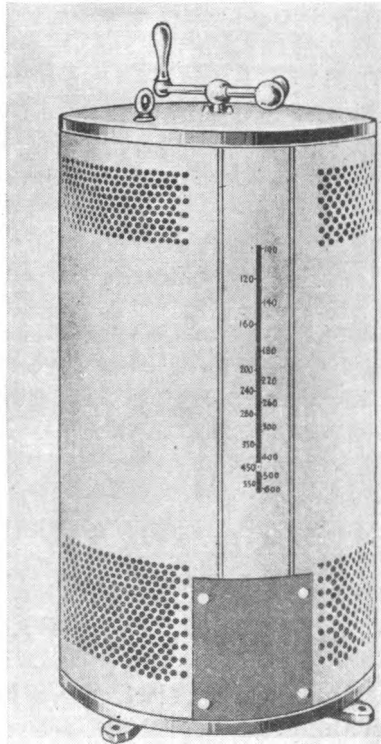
Transformer type a. c. arc welder.
